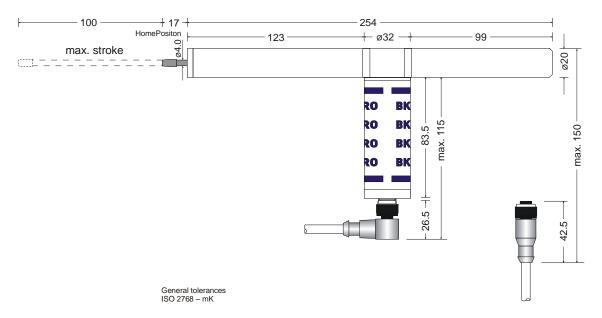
Mechanical Dimensions – Scanner TK9LIN100
